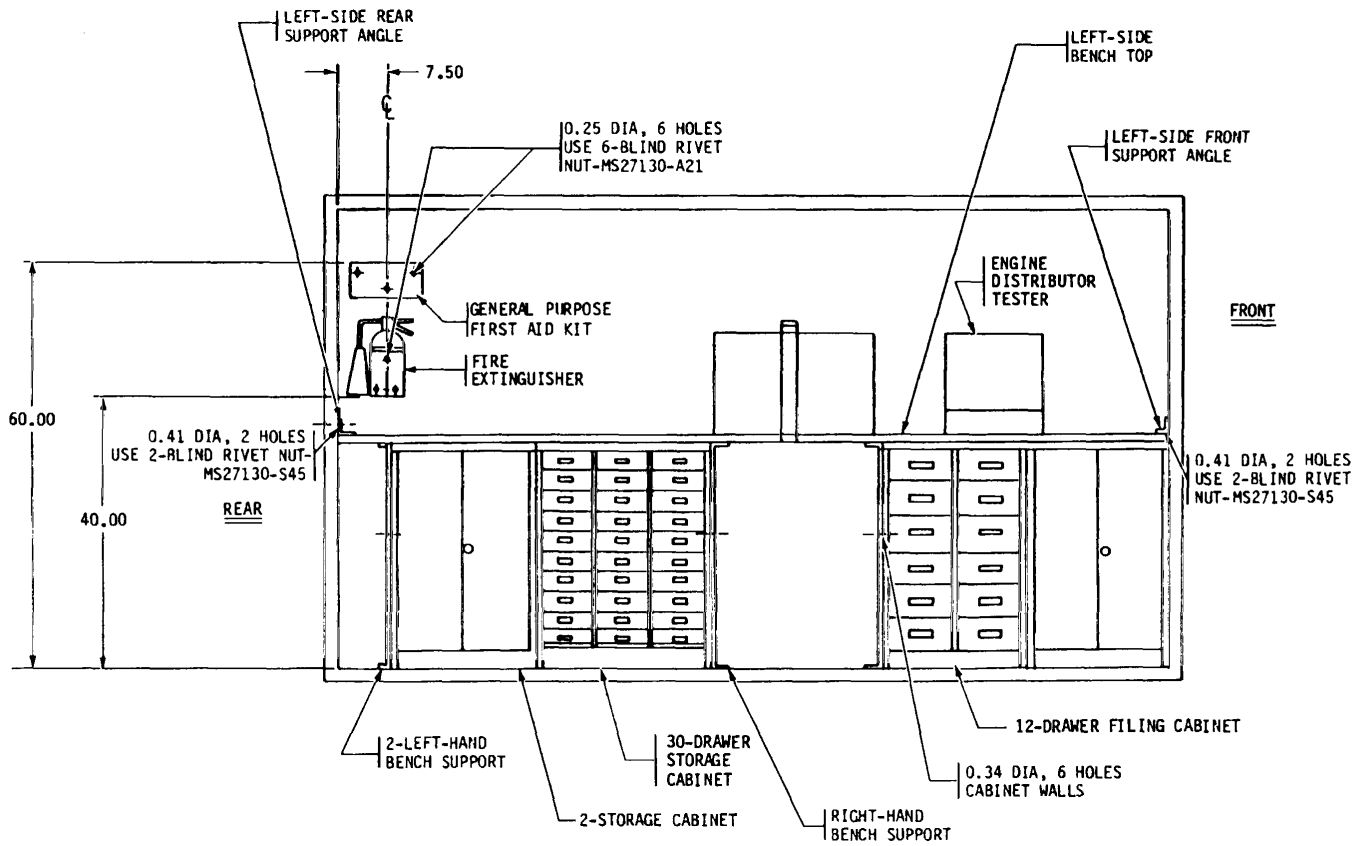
Components to be Mounted, Unit 1, 280, Left Side Elevation.
